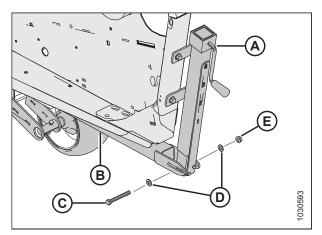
Jack and Outboard Wheel Assembly – View from Rear
